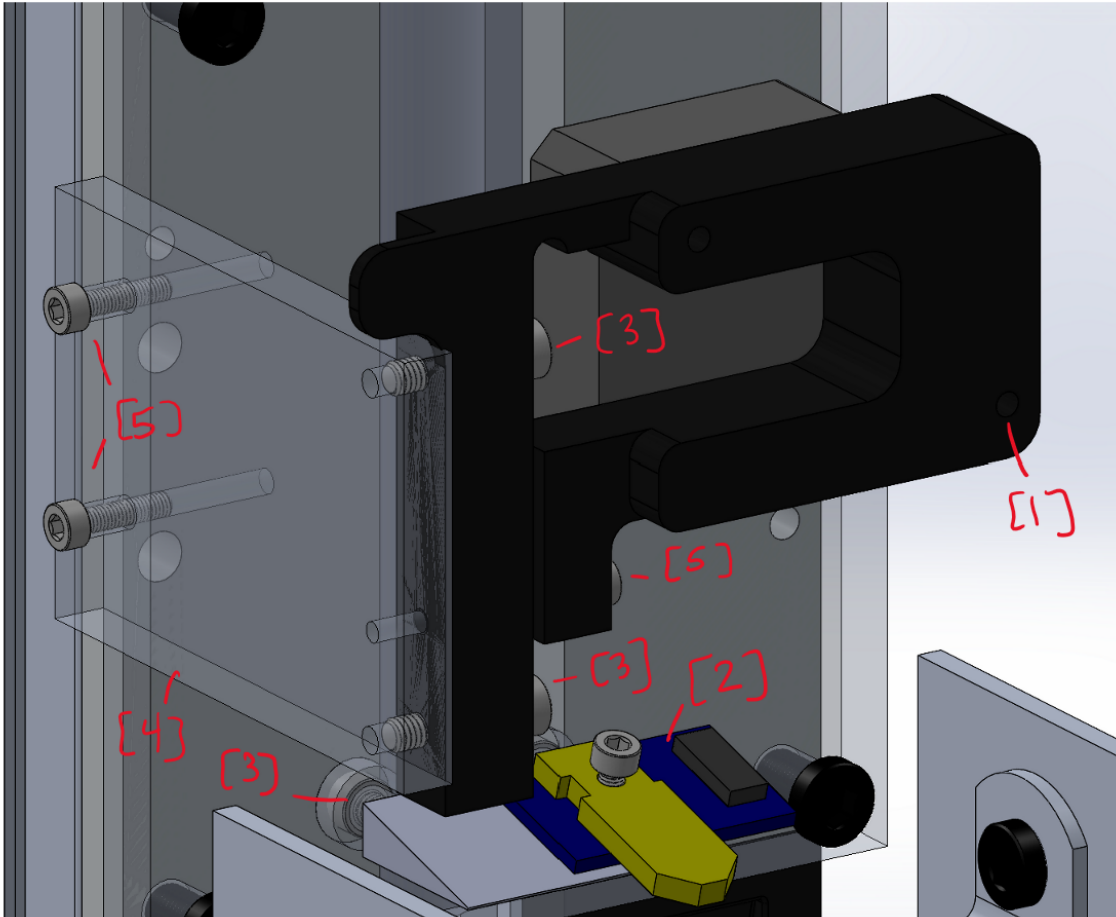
Ball-Screw Mounts Assembly of Physical Prototype.
